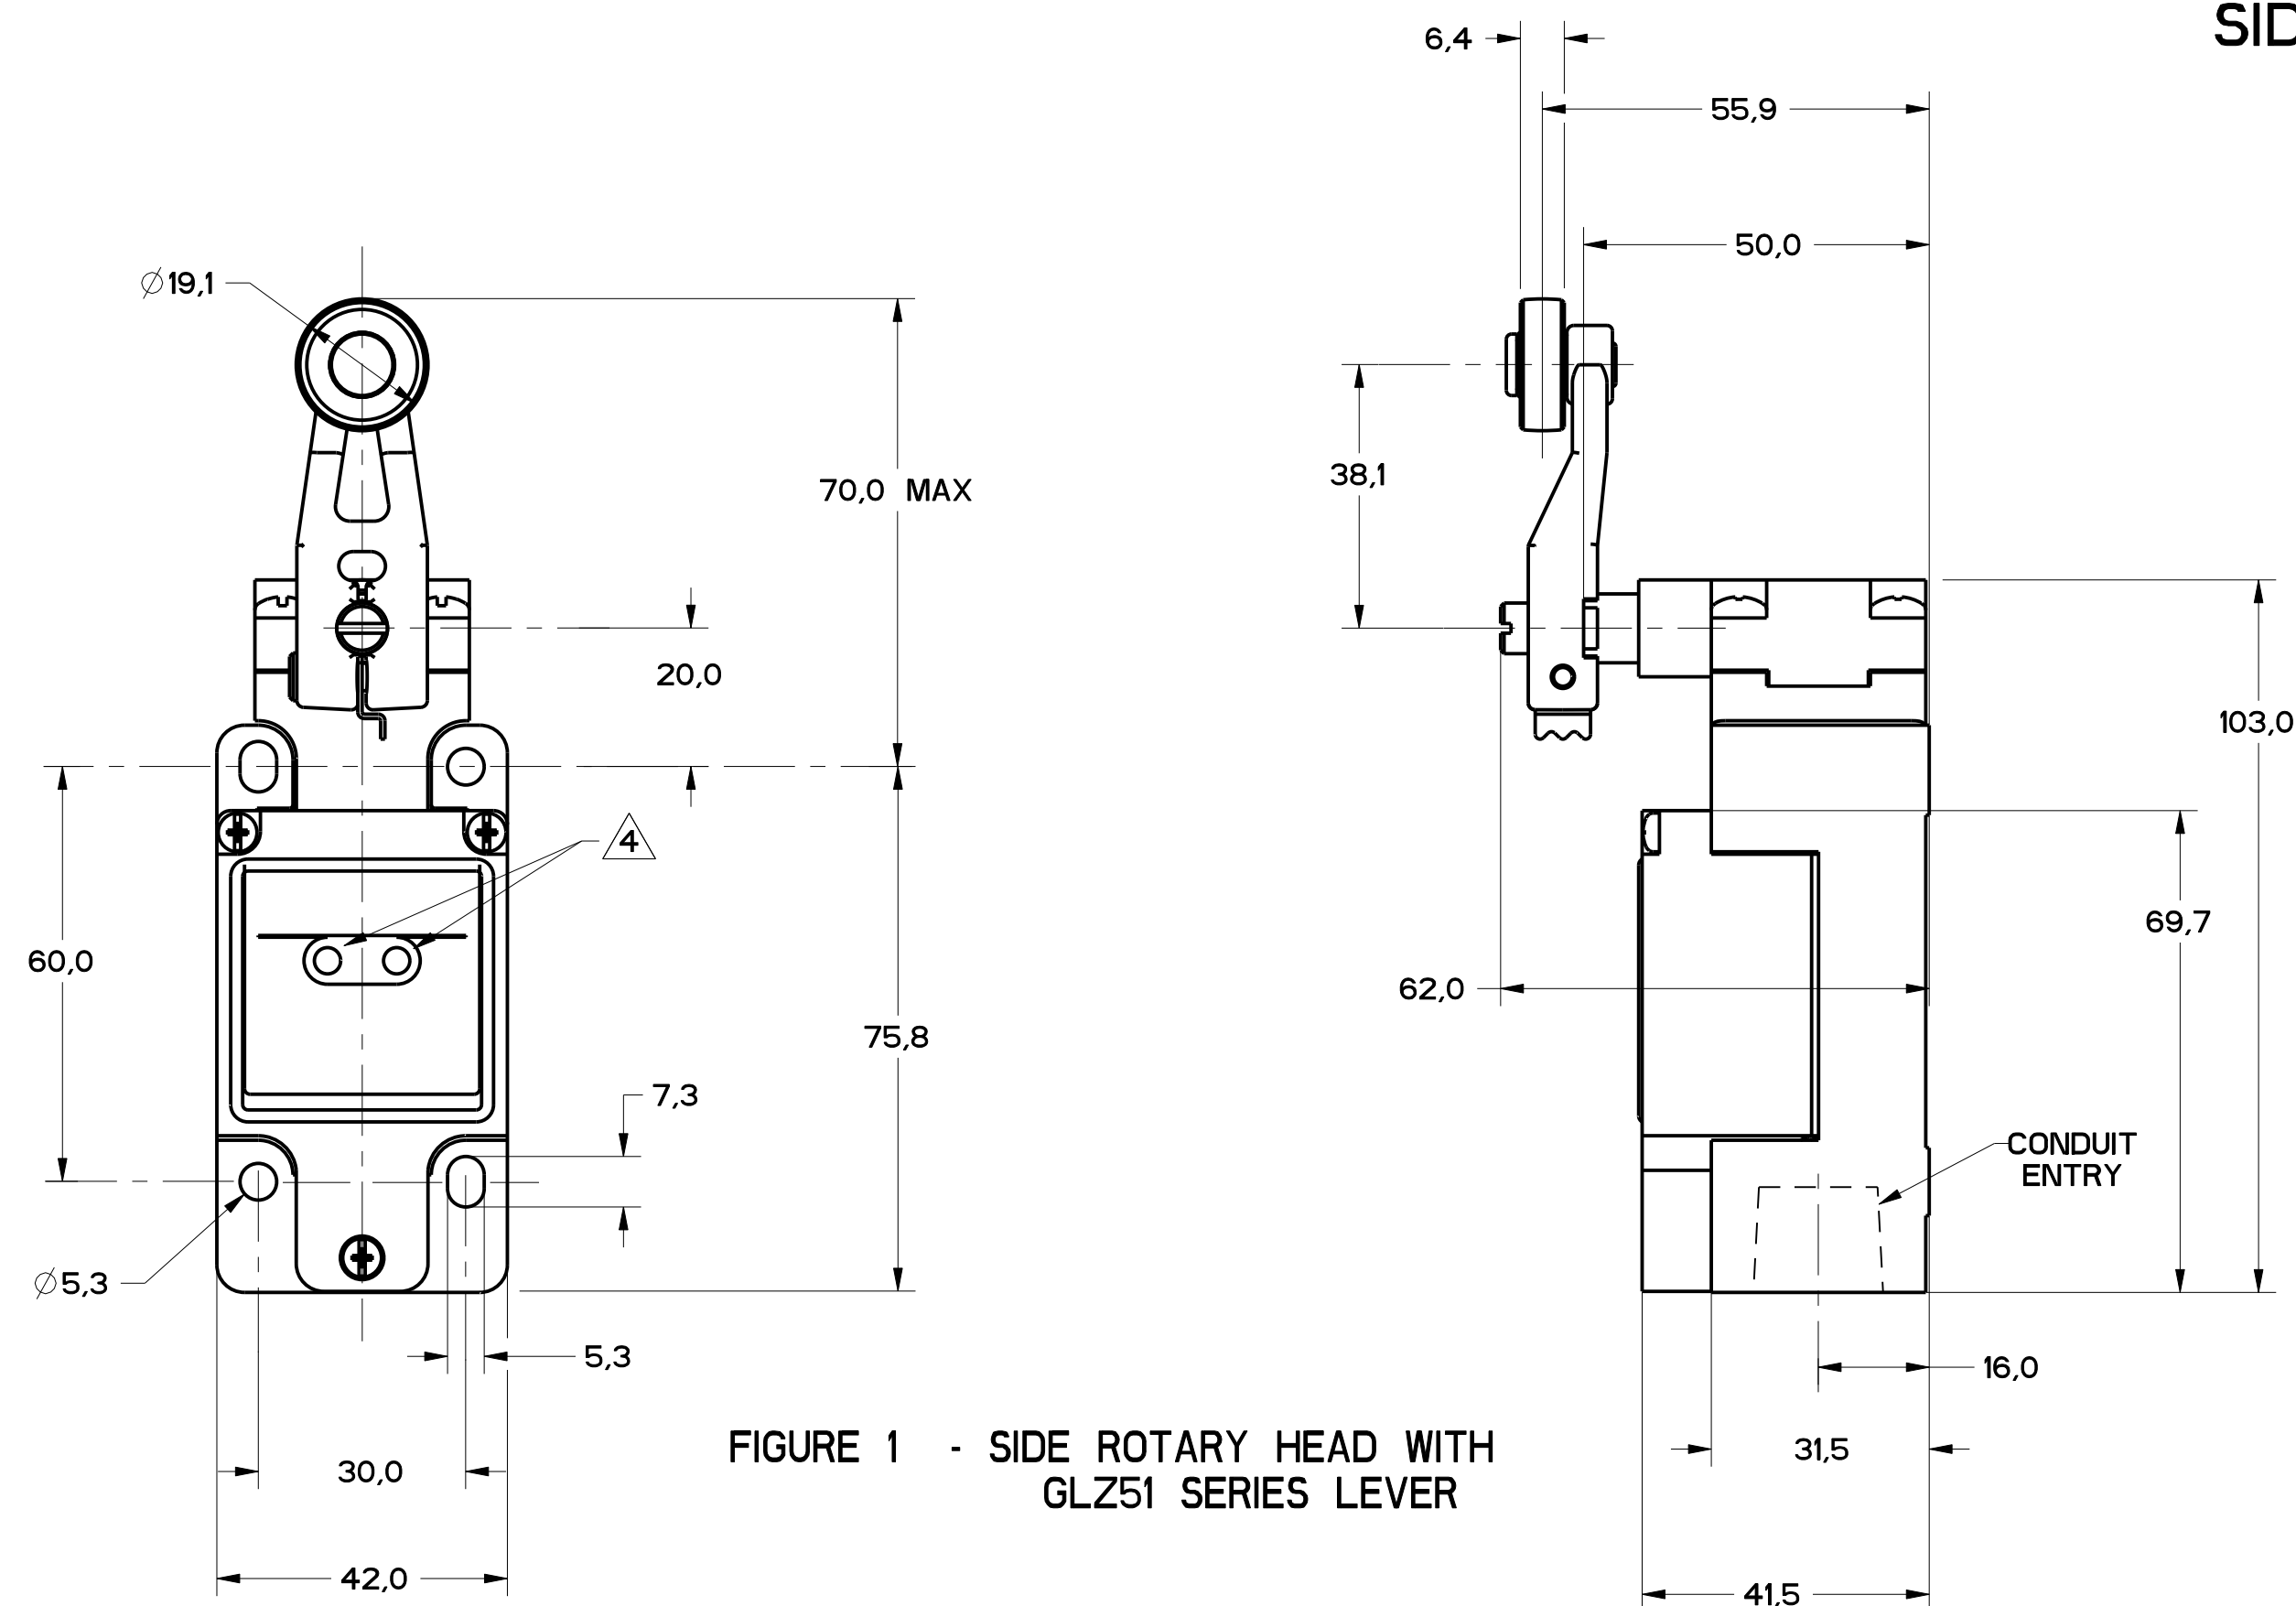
SIDE ROTARY HEAD WITH GLZ51 SERIES LEVER
